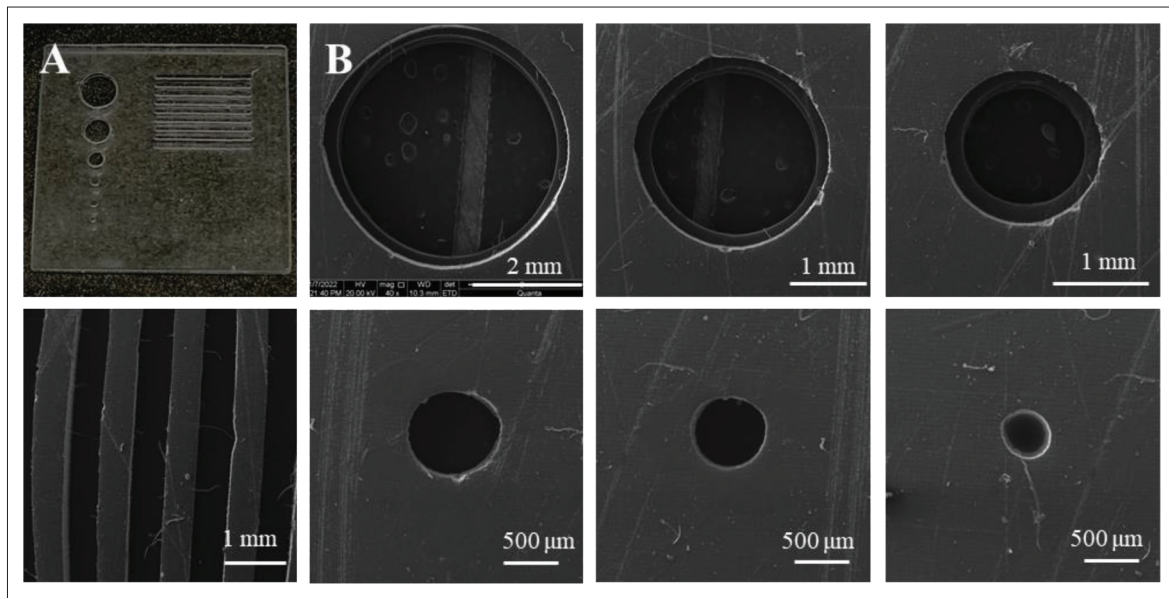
Forming dimension accuracy experiment of 3D printing. (A) Printed accuracy sheet, (B) SEM of accuracy sheet.
